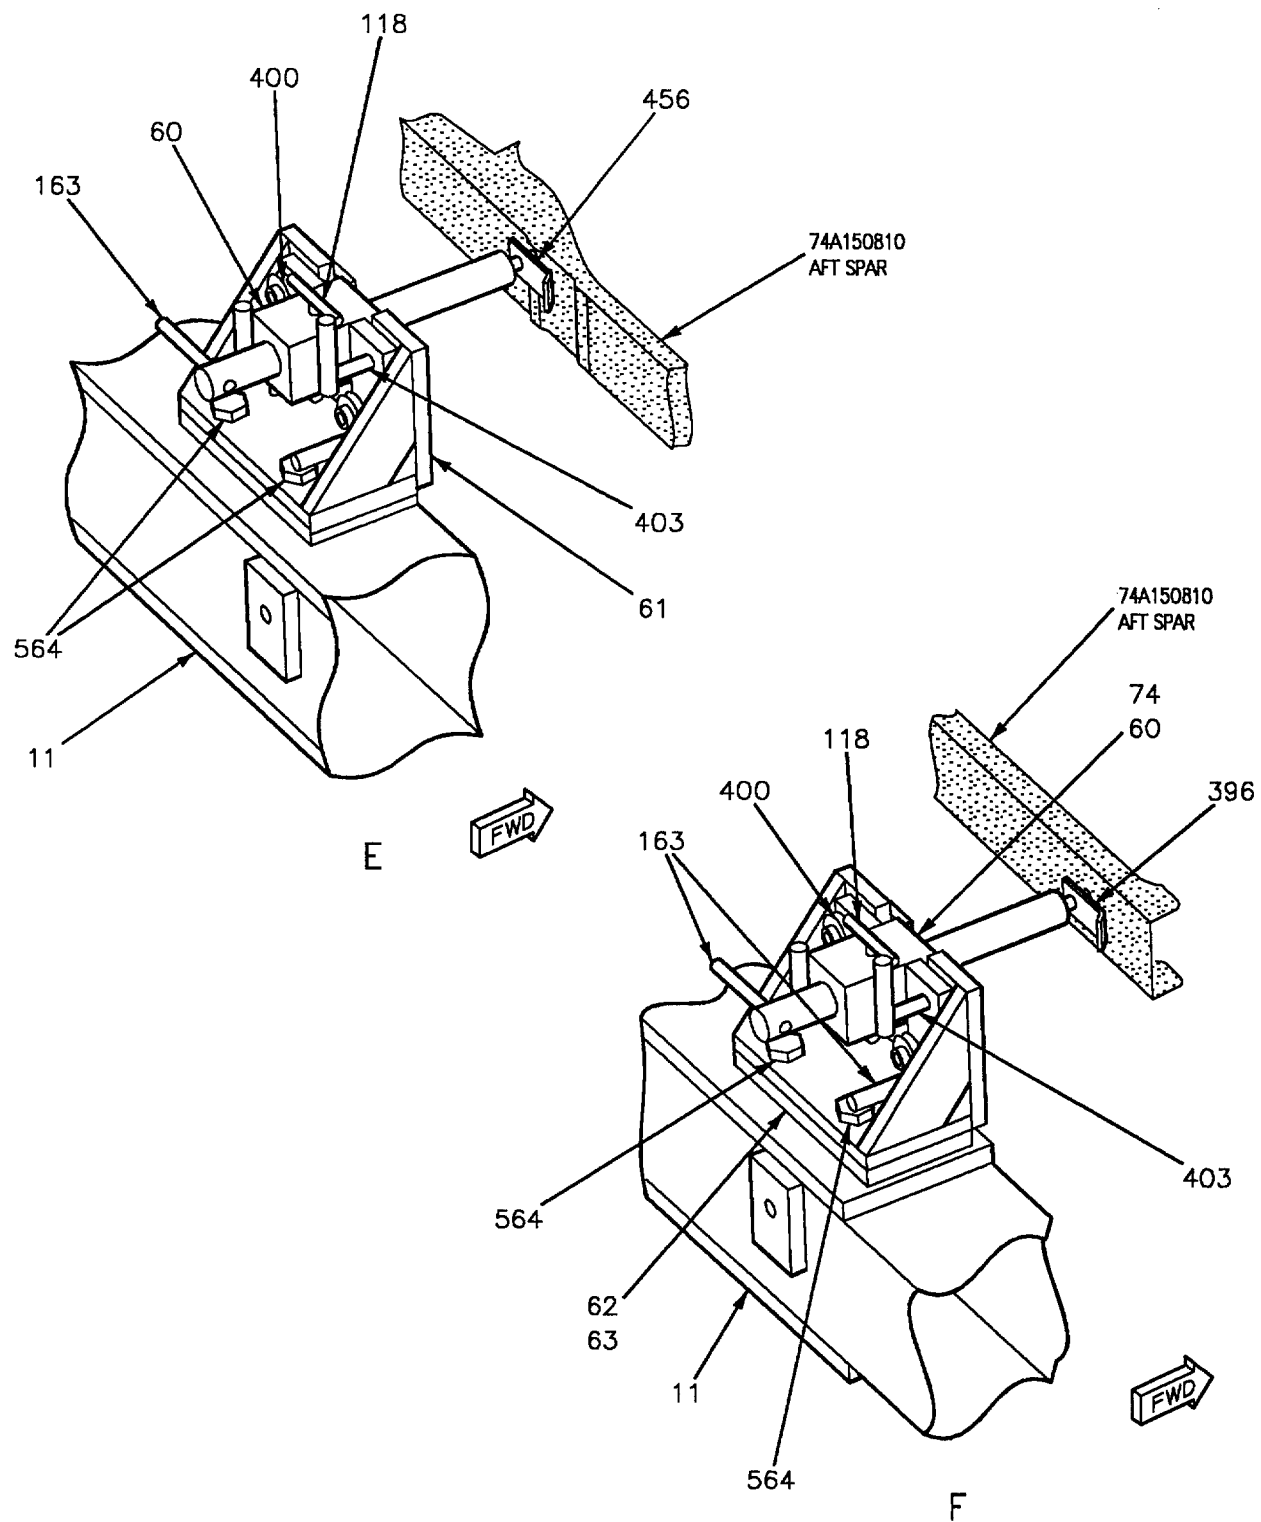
Installation of Outer Wing into Fixture (Sheet 5)
